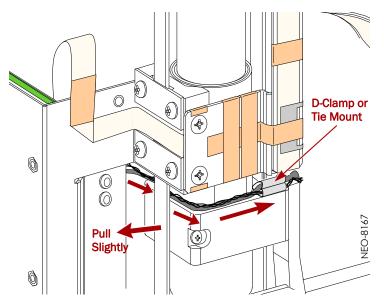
Remove the Rotary Motor Cable and Optical Sensor Cable
